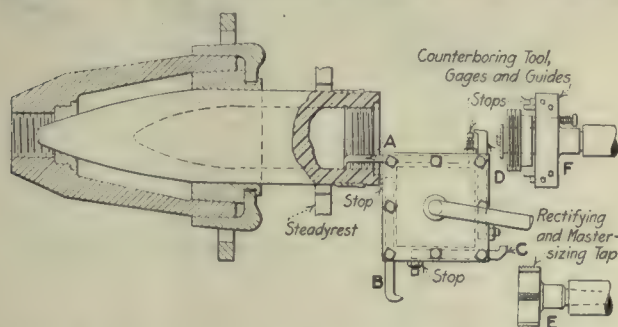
TOOLS USED IN THREADING THE BASE OF 6-IN. PROJECTILES, OPERATION 9
